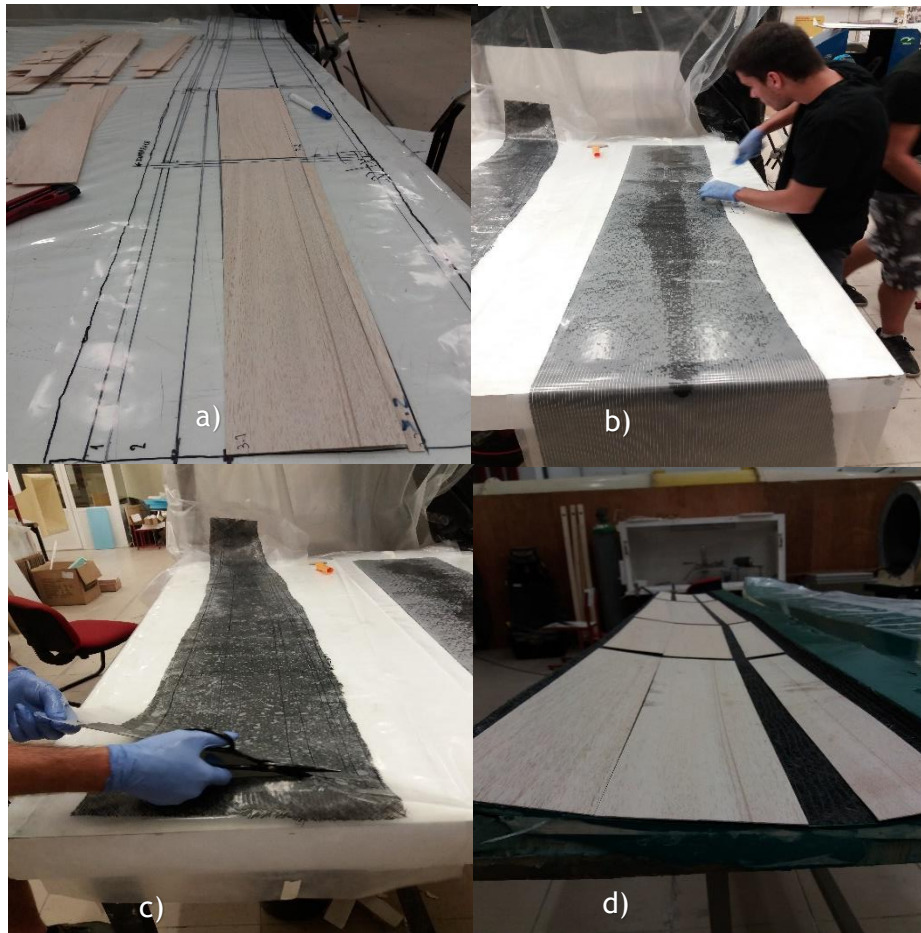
Wing shell manufacturing a) drawing the wing skins structure on clear flexible plastic sheet and cutting the balsa wood core sheets to size; b) laying up the bi-axial carbon fibre cloth with epoxy resin; c) cutting the carbon fibre to measure according to the clear plastic sheets markings; d) applying balsa wood on the carbon fibre (note the gap for the unidirectional carbon fibres spar cap on the lower right).
